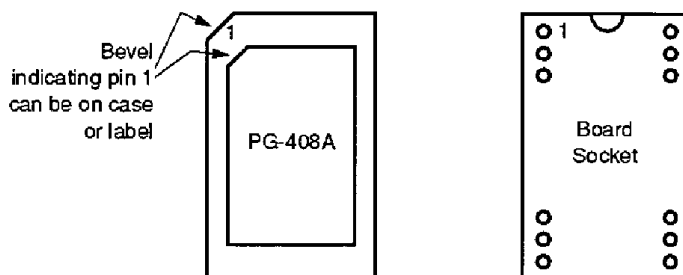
Locating Pin 1 on the PG-408A and Board Socket
